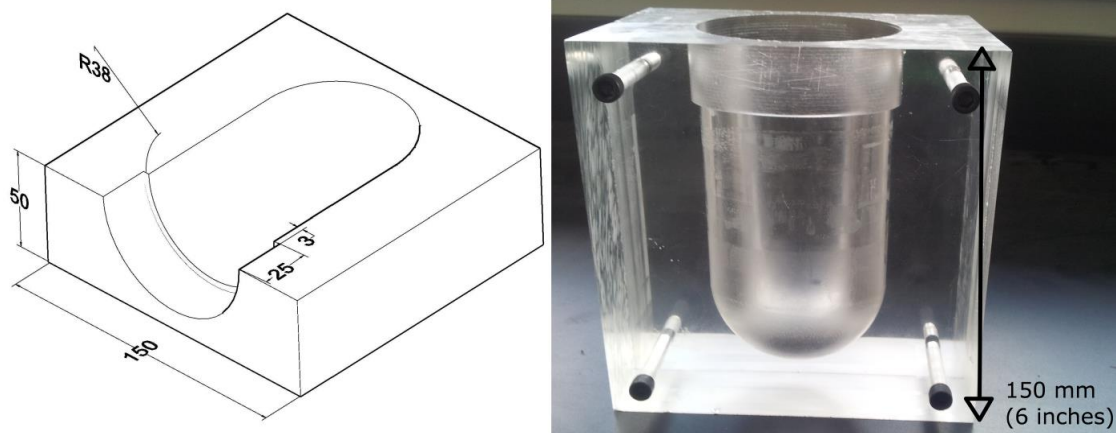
Isometric View and Photo of End Cap (Dimensions in mm)
